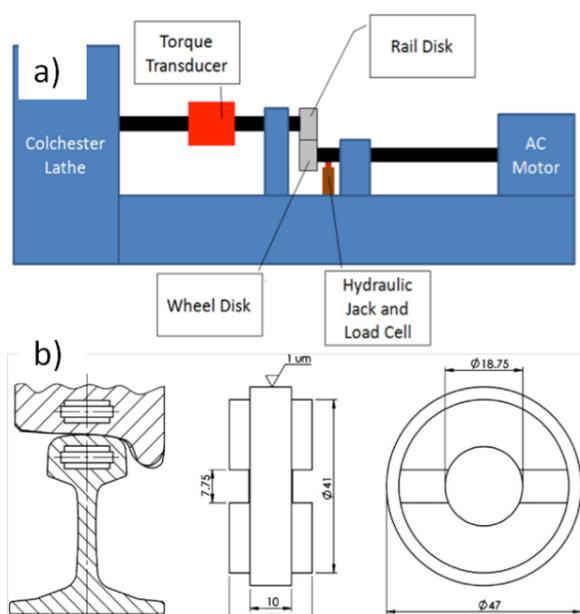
a) Schematic of SUROS Twin-Disc rig; b) Drawings of SUROS specimens which are cut from sections of wheel and rail
